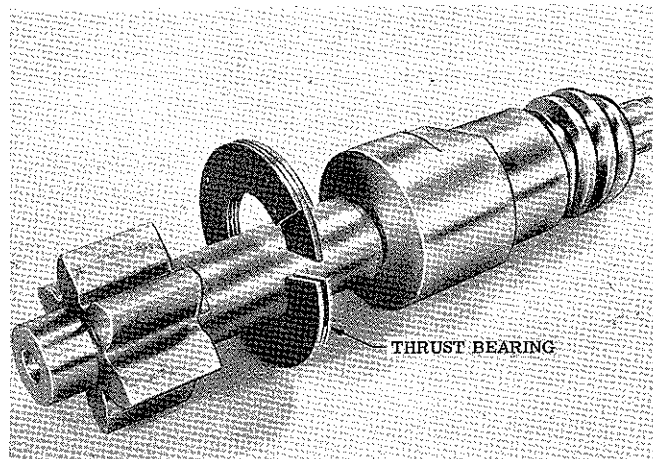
Pinion Shaft and Two-Piece Thrust Bearing
